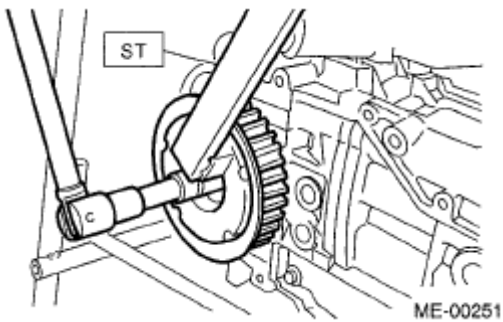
Identifying Cam Sprocket No. 1 Using Cam Sprocket Wrench ST (499207400)
